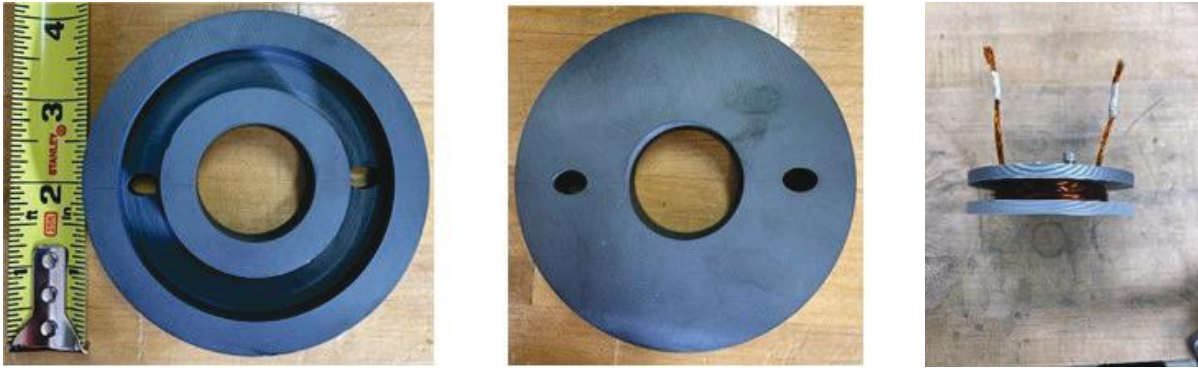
Photos of IPT transformer cores and winding jig.
